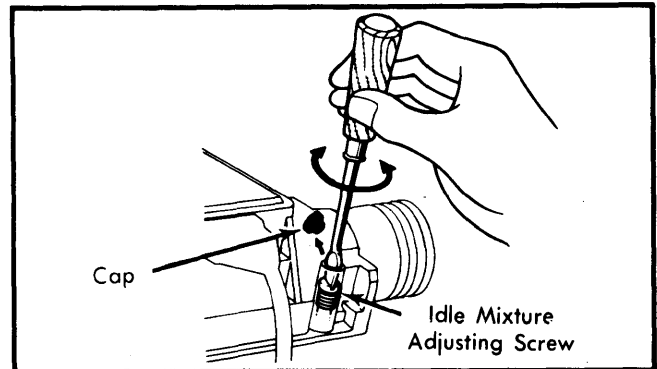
Idle Mixture Adjusting Screw (Fuel Injected Models)
